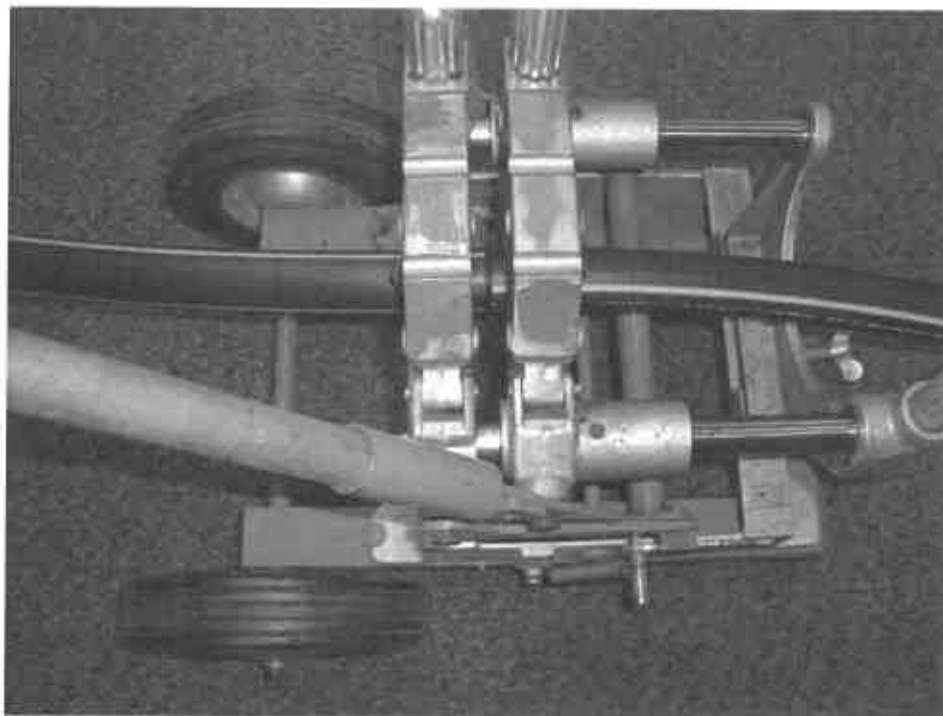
Coiled Pipe Installation in Fusion Machine
